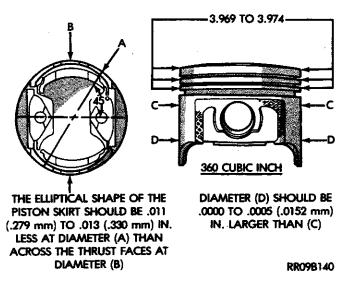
Piston Measurements—5.9L Engine FINISHED PISTONS
